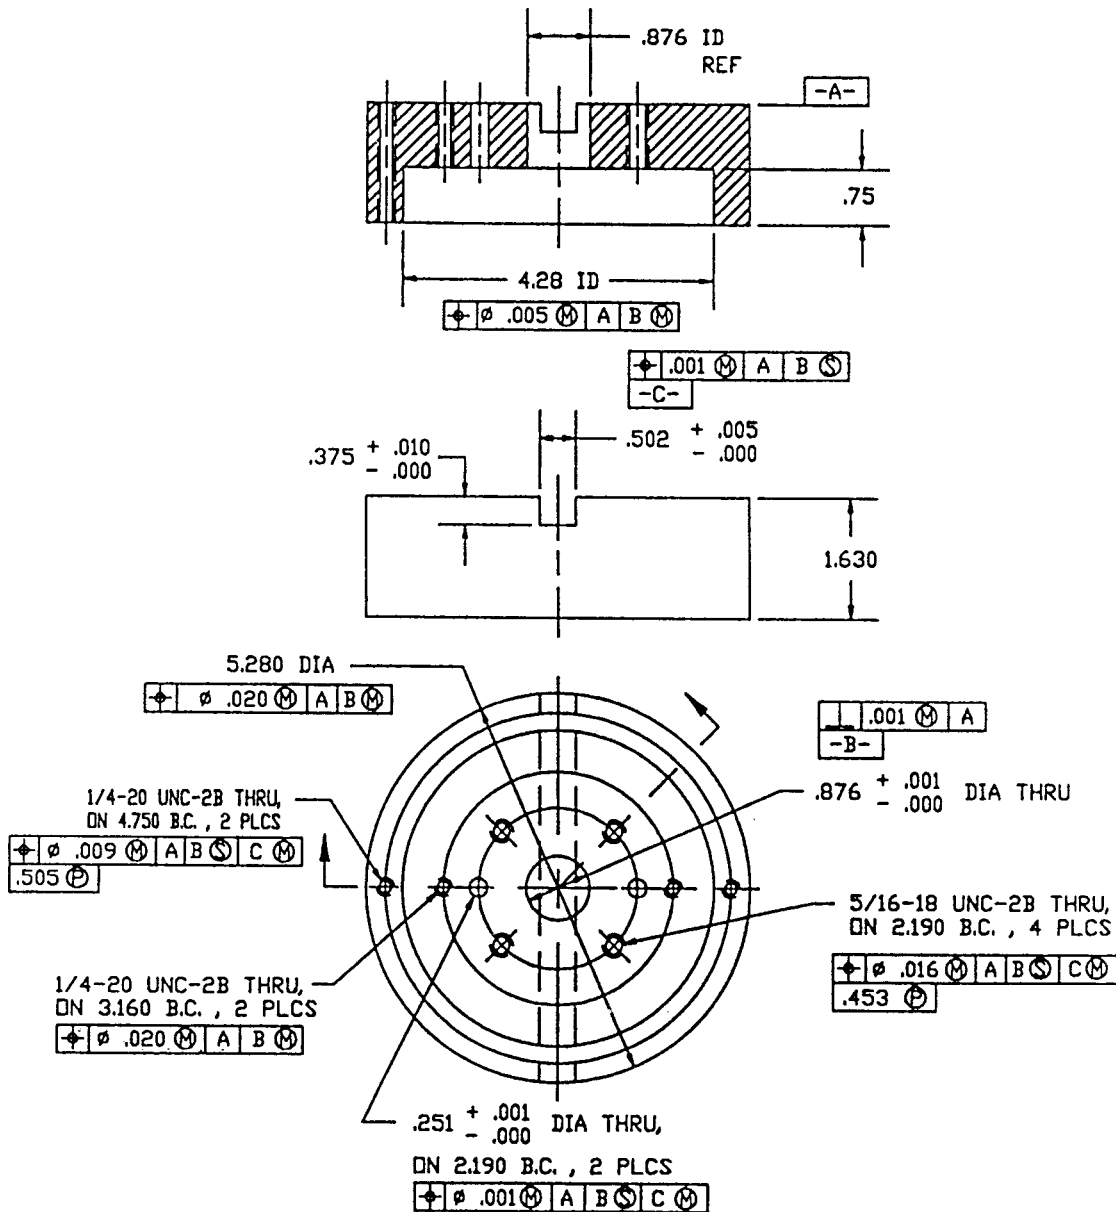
Outer Shell for the Shear Fixture in Inch-Pound Units
